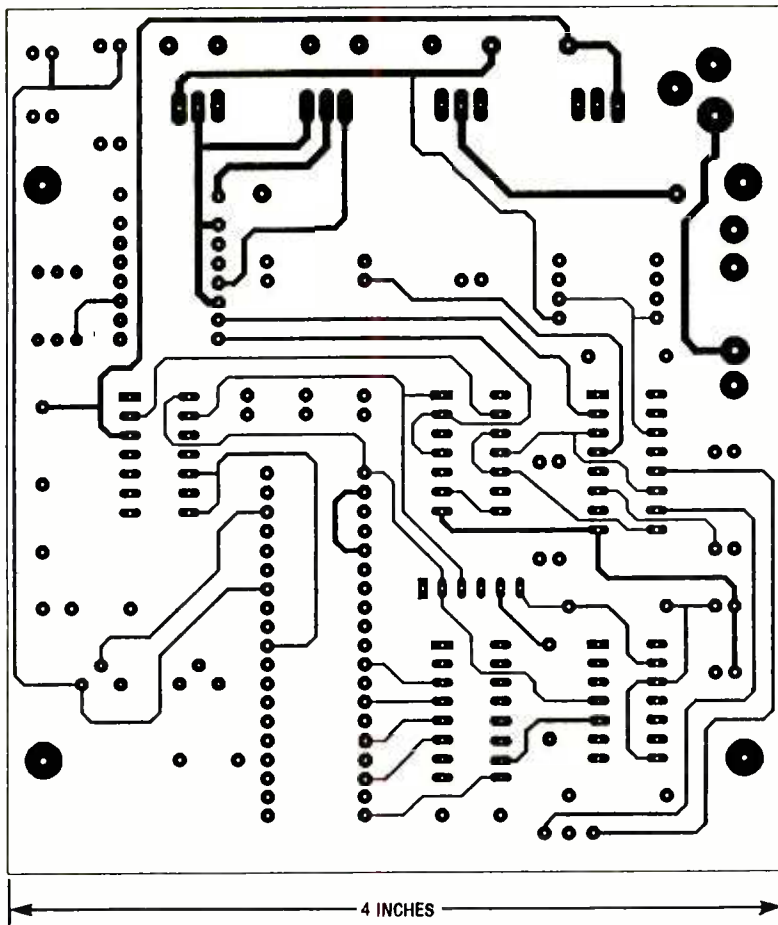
This full-size template shows the circuit board traces for the components side of the Battery-Butler's double-sided, printed-circuit board. If you decide to etch your own board, be very sure that the two traces are properly aligned before the etching process is begun.
